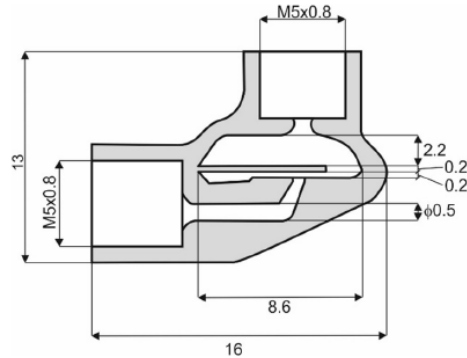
3D-printed monolithic passive valve presented by Walczak et. al. (2017) [26]. The shown dimensions are in millimeters.
